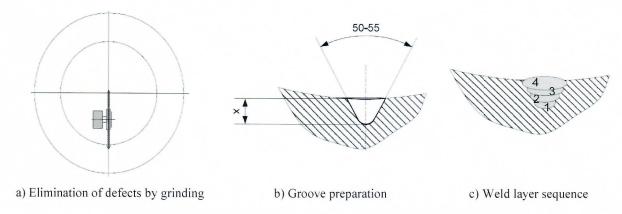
Elimination of defects, groove preparation and welding process
